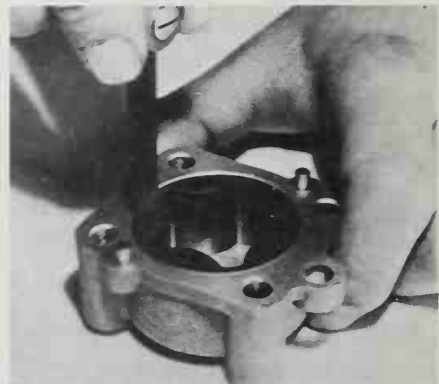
Measure clearance between outer rotor and oil pump body as shown. Desired clearance is 0.07-0.15 mm.
